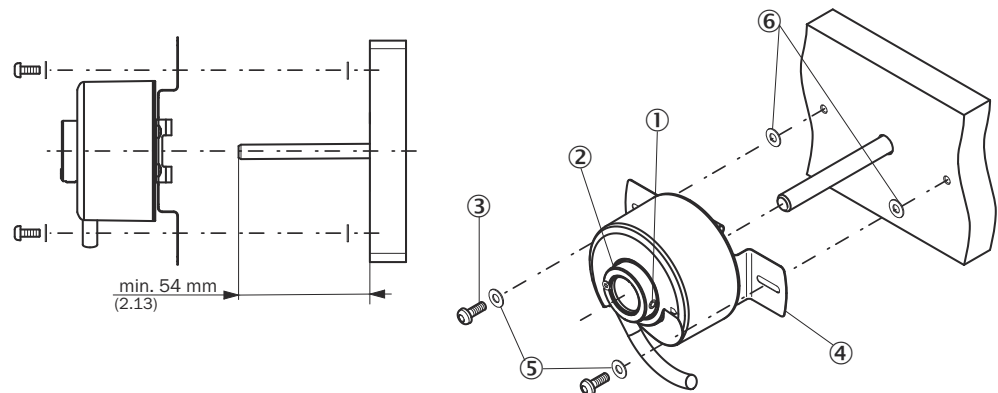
Mounting through hollow shaft with stator coupling 0, B, D, E, G (clamping at the rear)
